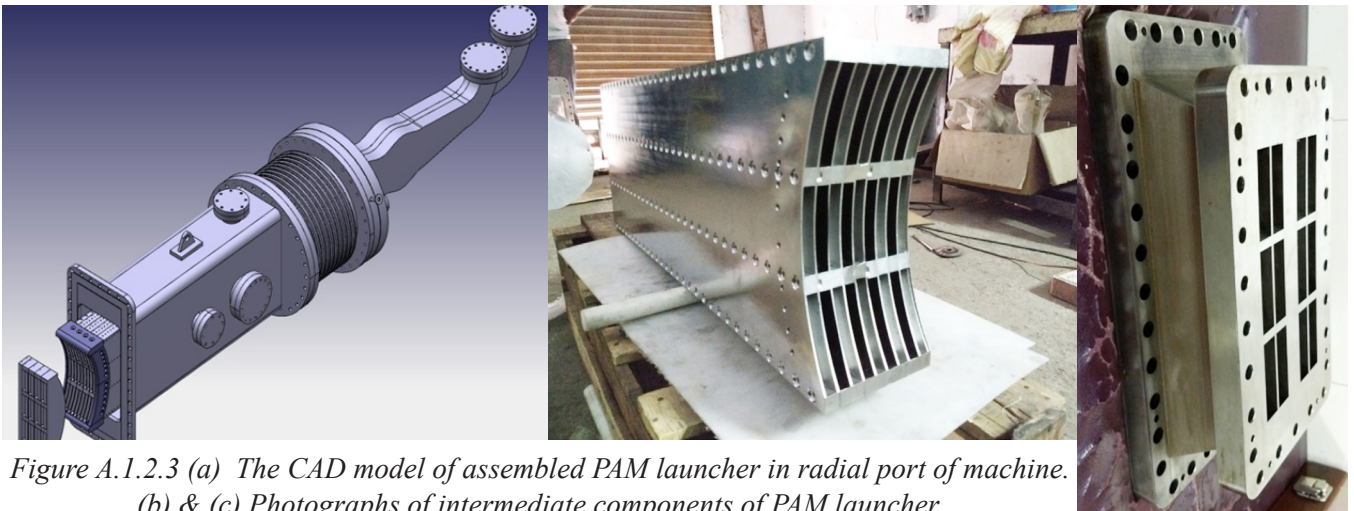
(a) The CAD model of assembled PAM launcher in radial port of machine. (b) & (c) Photographs of intermediate components of PAM launcher.
